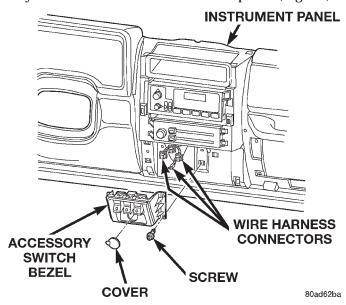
Instrument Panel Accessory Switch Bezel Remove/Install
